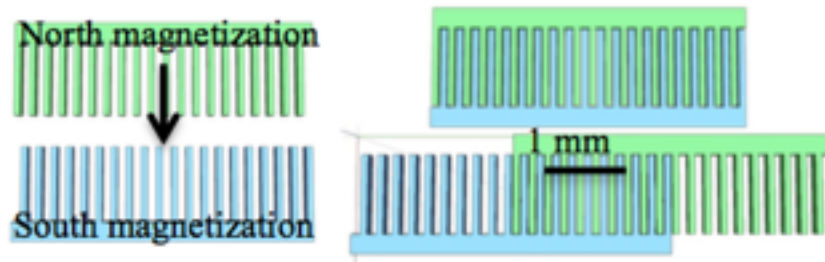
Schematic of assembly methods: two combs are laser machined and separated from each other, then can be assembled (top right) as a single array, or (bottom right) as an extended array by offsetting each comb
